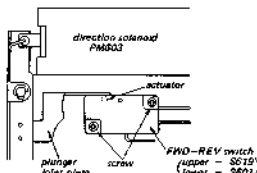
FWD/REV switch (S601, 619) position adjustment
